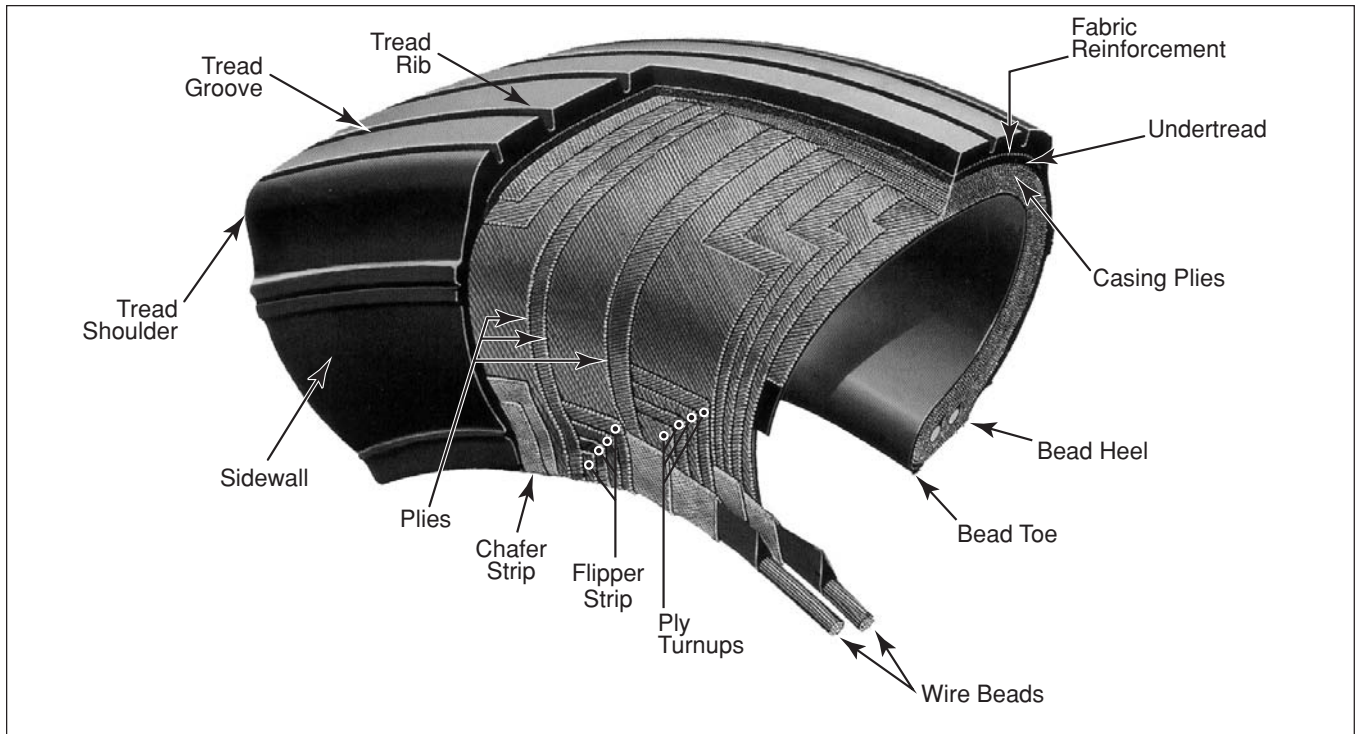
Sectional View of Bias Aircraft Tire Showing Construction Details
